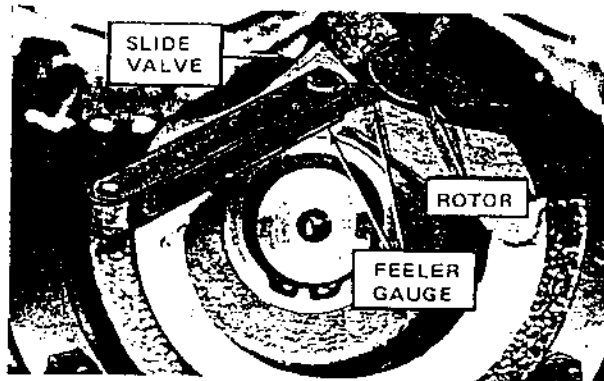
CLEARANCE BETWEEN THE SLIDE VALVE & ROTORS
